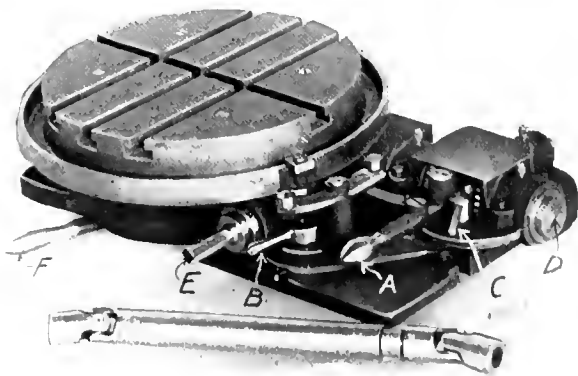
Rotary Milling Attachment Removed from Table, in order to show Details
